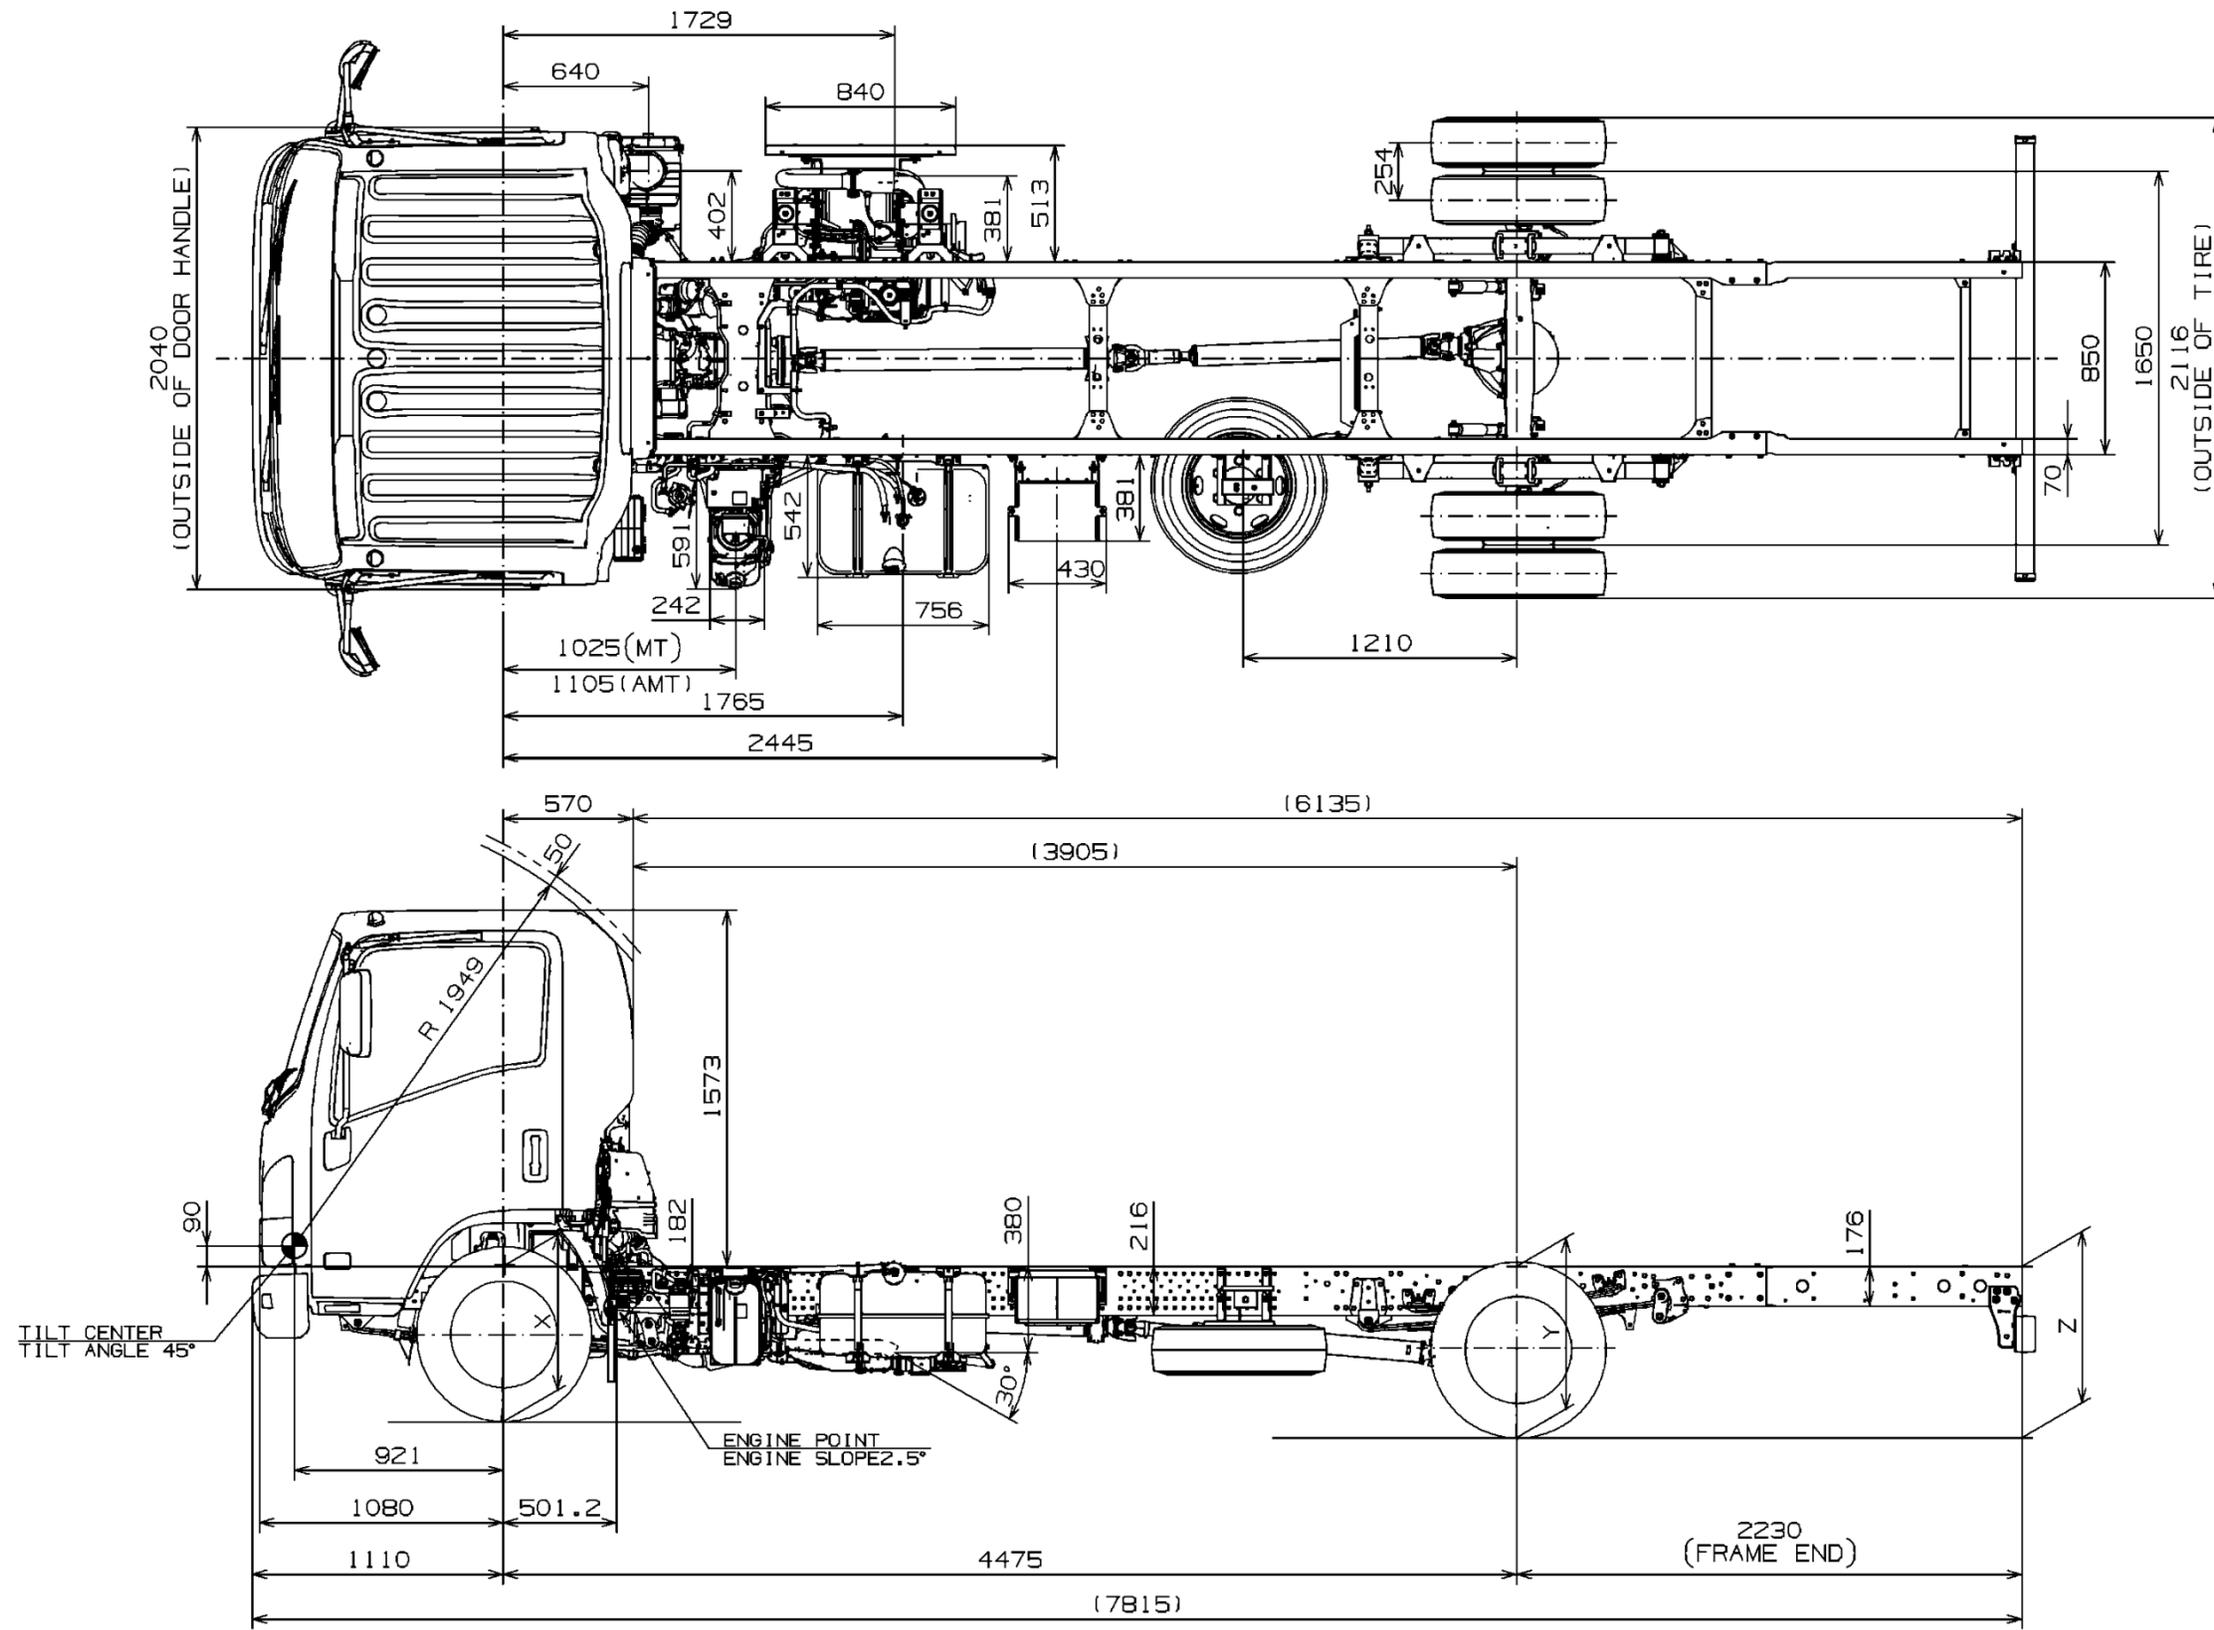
Cab Chassis Drawing NPR75L/U-KL5VAYE
